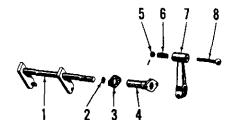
Exploded view of the dual speed shifter located on right side of the clutch housing.
